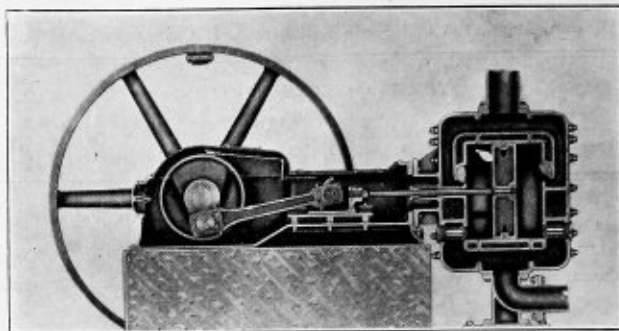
Sectional View of "Imperial" Vacuum Pump
